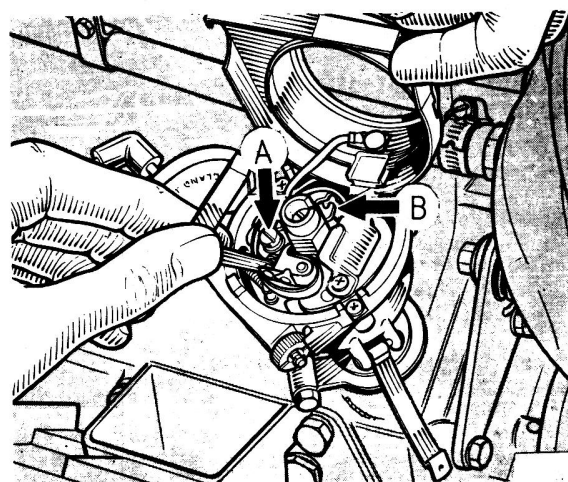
CHECKING CONTACT BREAKER GAP – 22D6 AND 25D6
